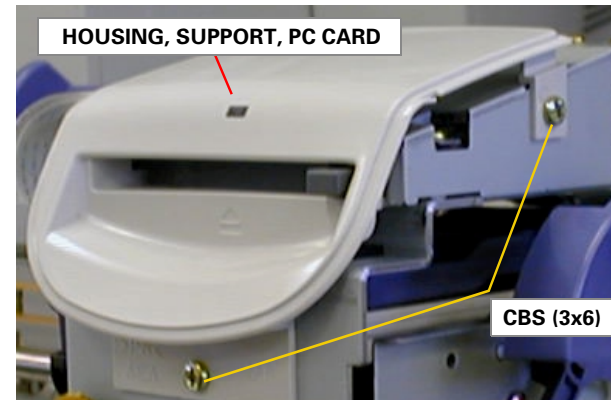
HOUSING, SUPPORT, PC CARD Removal
